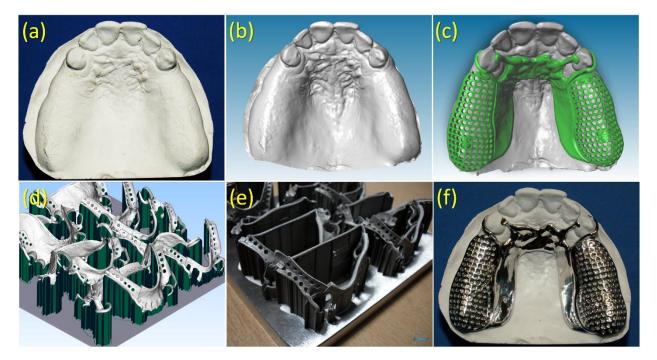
Photographs illustrating the process of designing and fabricating removable partial dentures (RPDs) framework using laser-sintering technique; (a) master cast of partially edentulous arch, (b) 3D scan of the model, (c) designing of RPDs framework, (d) placing RPDs frameworks in a digital platform, (e) processed RPDs frameworks in the producing platform, (f) the final RPD framework.
